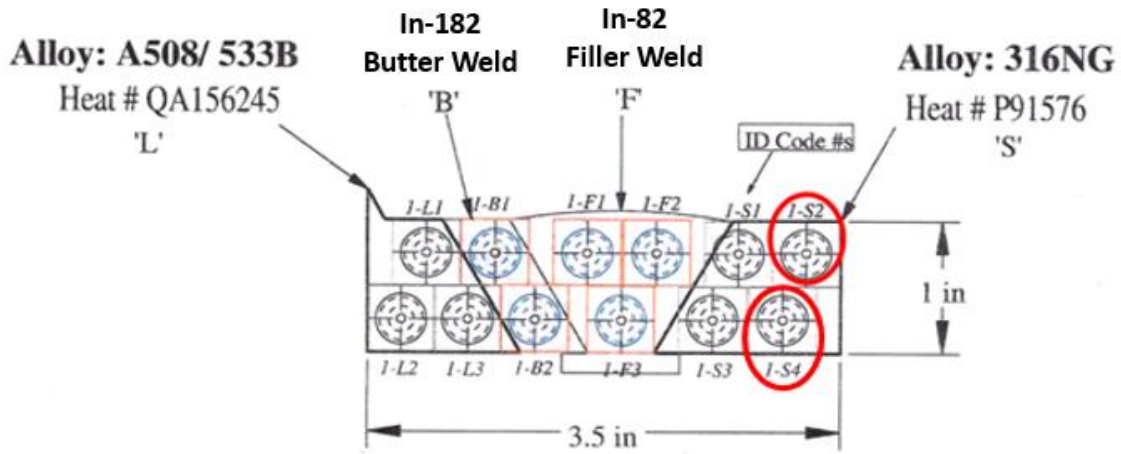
1 Schematic showing the highlighted location (in red circle) of the 316 SS base metal specimens (ET-F50, EN-F51, and EN-F53) with respect to heat affected zone (HAZ) in 508 LAS-316 SS dissimilar metal weld (DMW).
